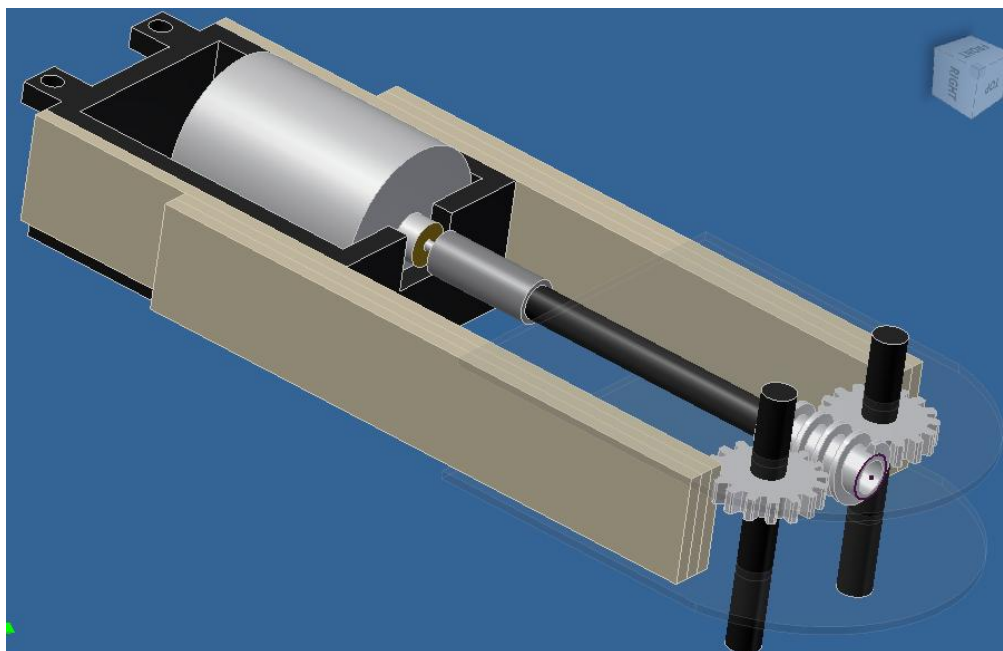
Motor connected to a worm gear driving two oppositely turning gears
